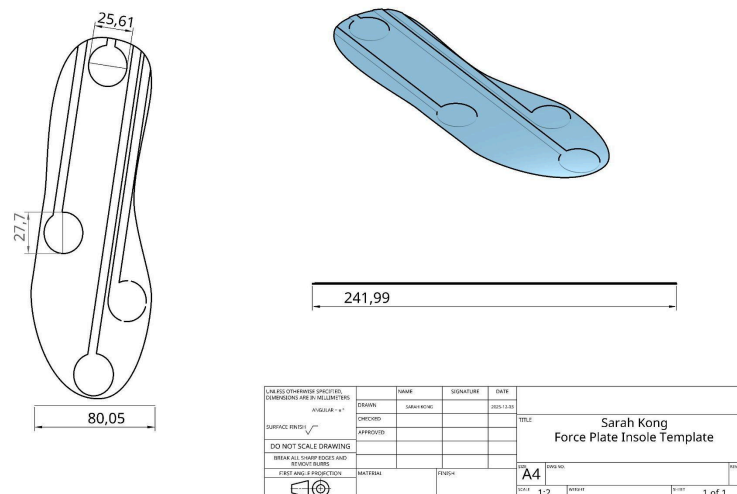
Insole Isometric and orthographic views of the finalized insole template, showing specific Velostat and copper tape traces, and overall dimensions (mm) used for fabrication and component integration.
